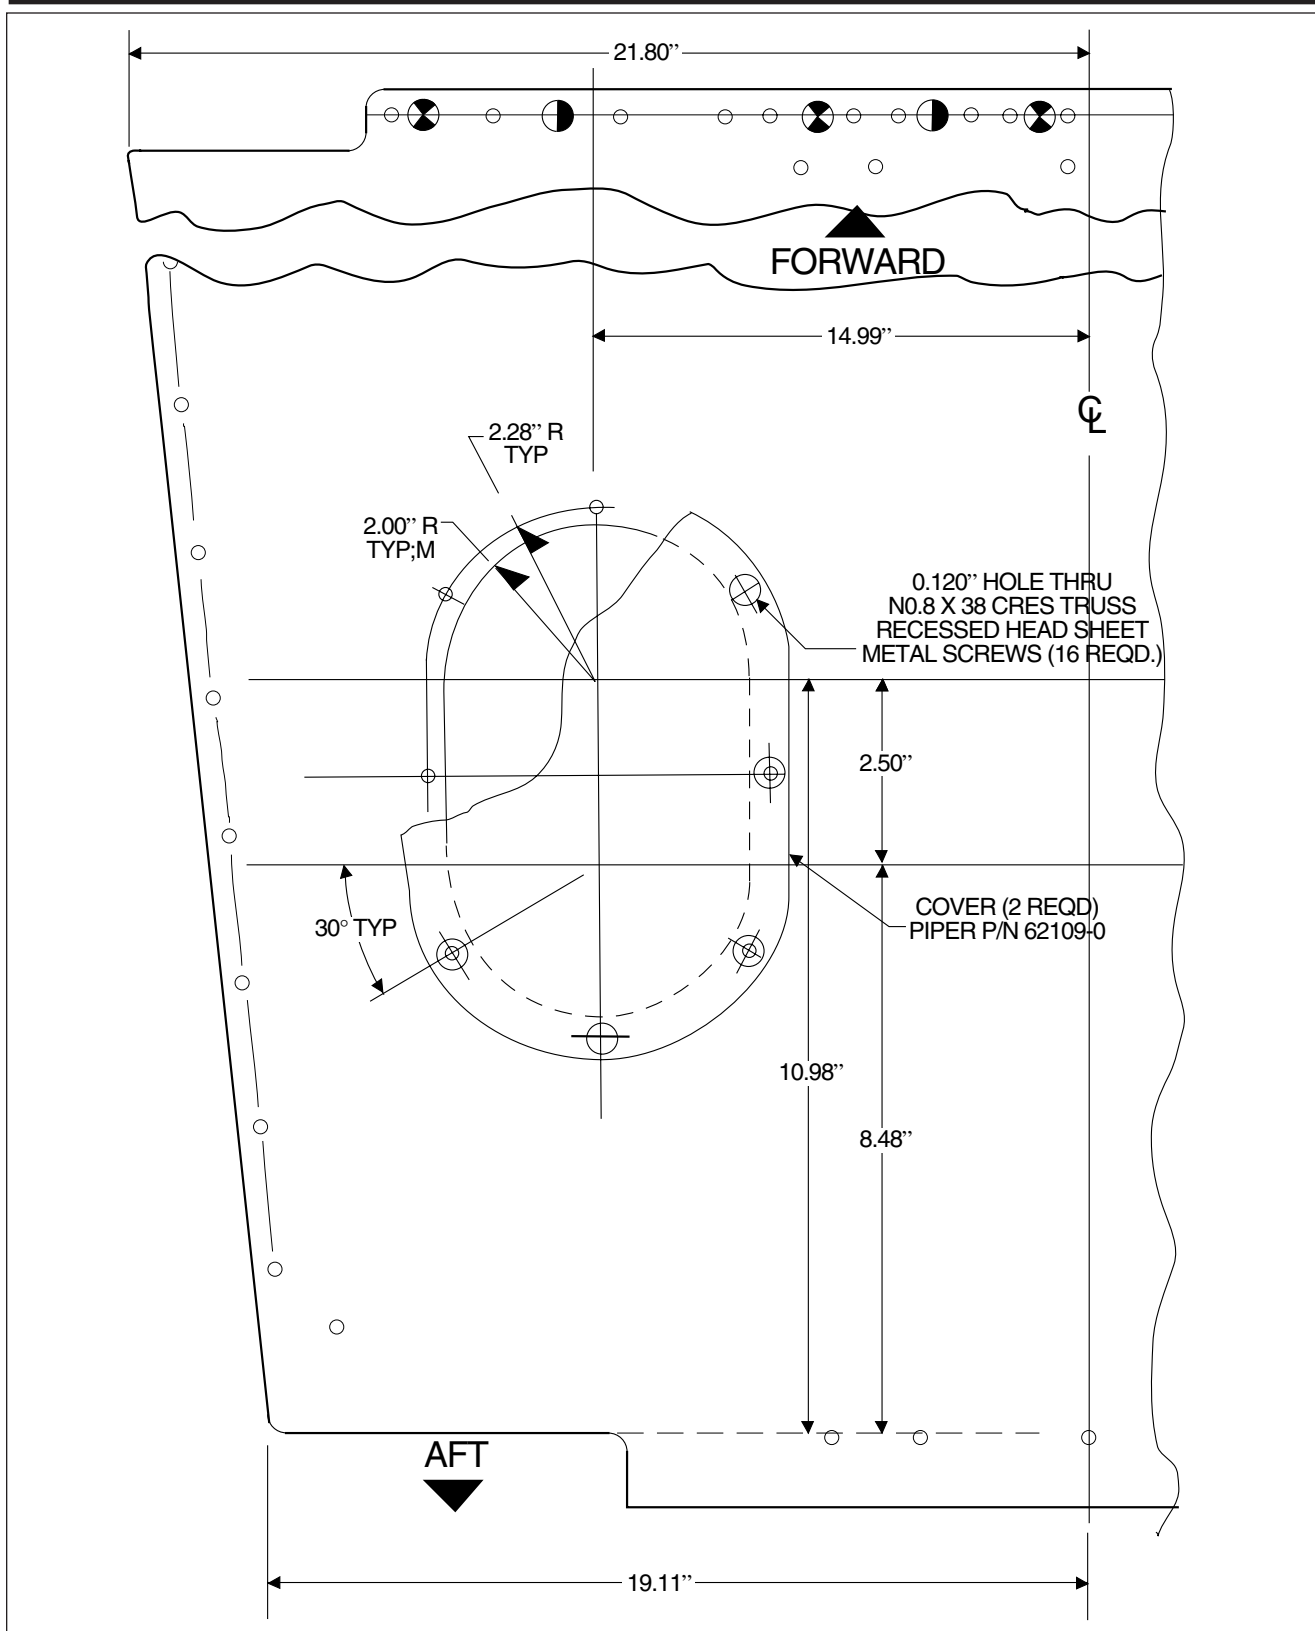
Baggage Compartment Inspection Holes Cutout Details
